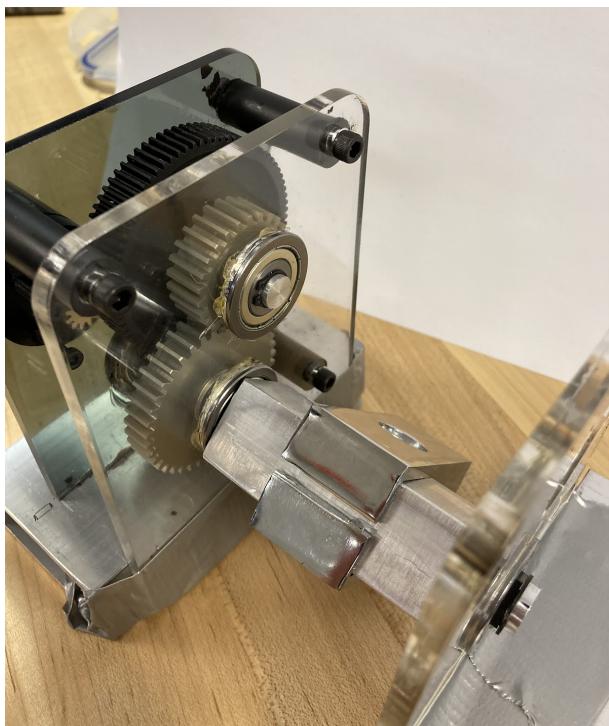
Close-up of gearbox assembly that drives swinging pendulum motion
